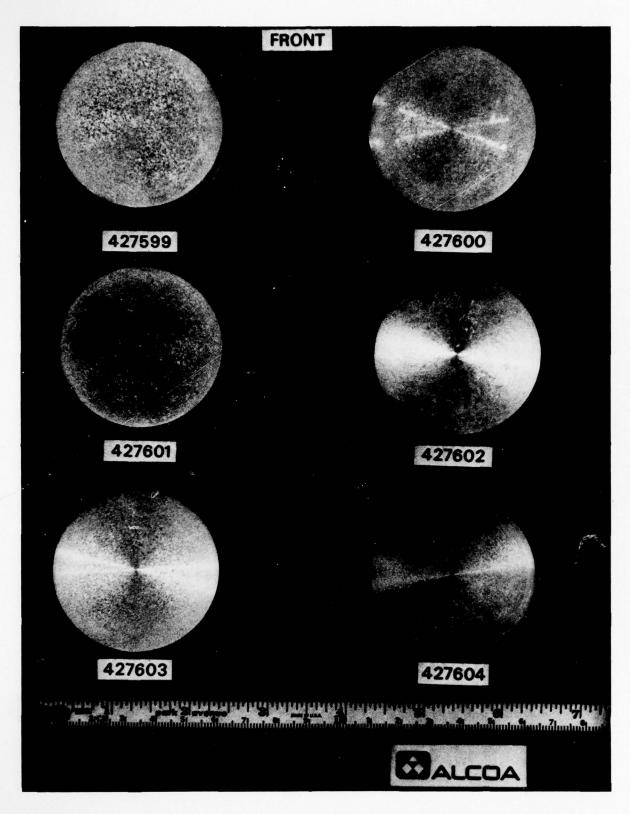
Etched Slices Removed from Front of Phase II Al-Mg-Li Extrusions (S. Nos. 427599 through 427604).
